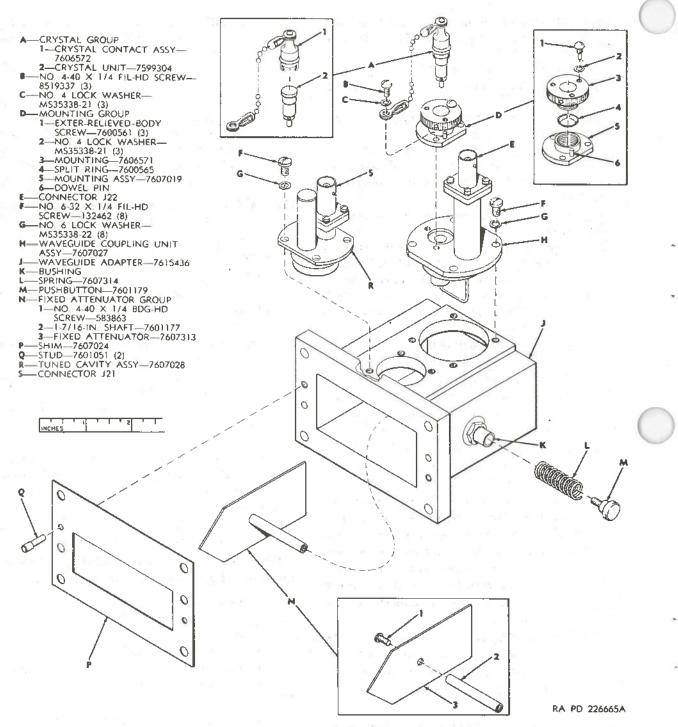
Frequency converter assembly (signal mixer) 7621829—partially exploded view.
